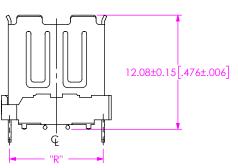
T: LOCKING TOOL APF6-025-03.5-XXX-04-X-T SHOWN (SAME AS FIG 1 & FIG5, EXCEPT AS SHOWN) (SOME CENTER FEATURES REMOVED FOR CLARITY)
